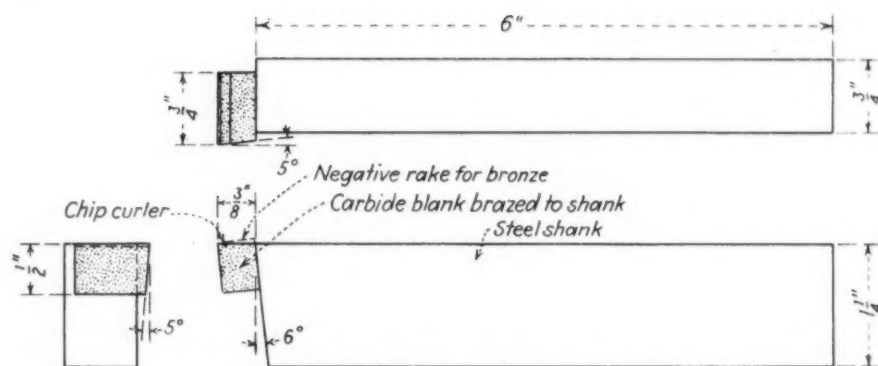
This unorthodox method of mounting a carbide tip on a shank has been successfully used in making a facing tool for steel gear blanks.
